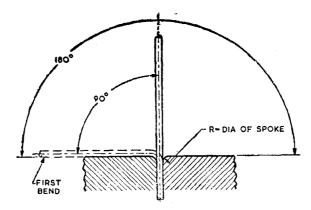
REVERSE BEND TEST FOR SPOKE WIRE
